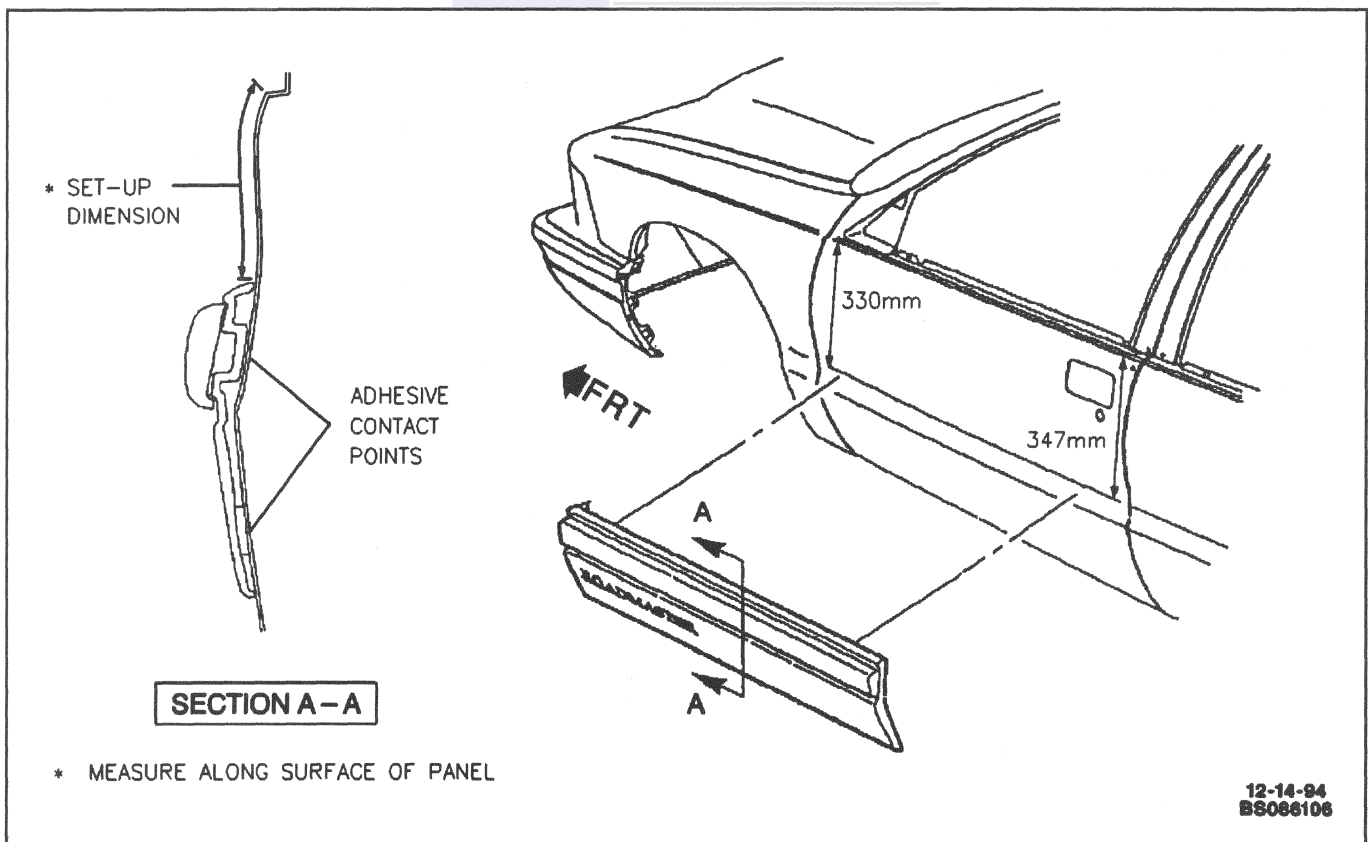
Front Side Door Center Molding-(Buick Sedan)
